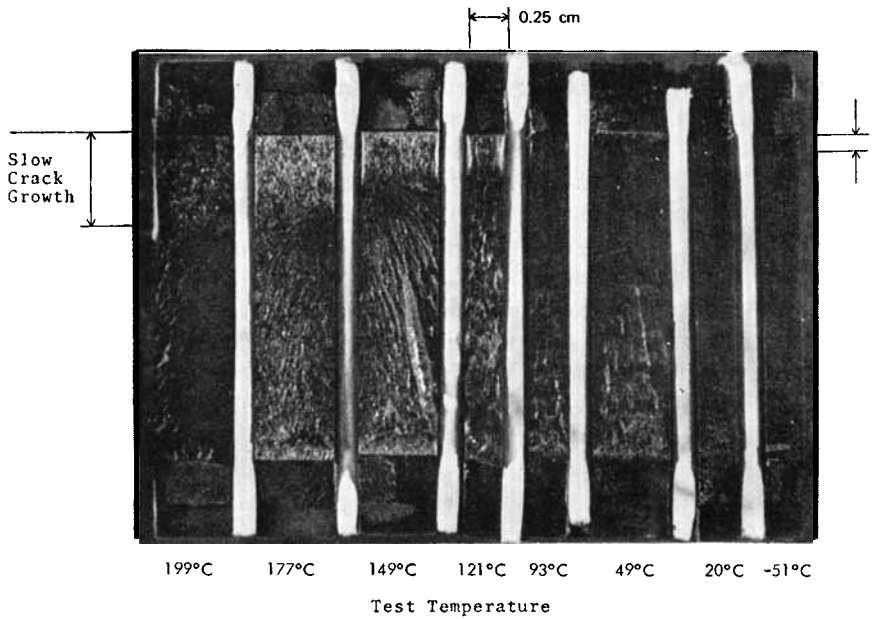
Polyphenylene oxide fracture surfaces.
